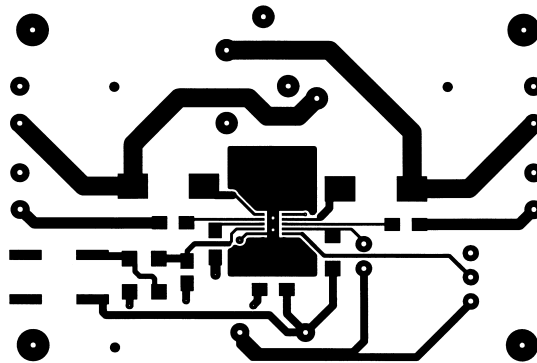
Recommended LD/YD PC Board Layout: TOP Top Layer
